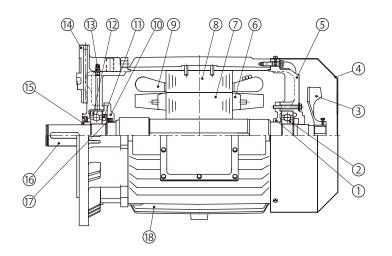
Direct-Coupled Motor for CYCLO Drive (Open Bearing Structure) (Example: N-200LL 45kW 4P)
